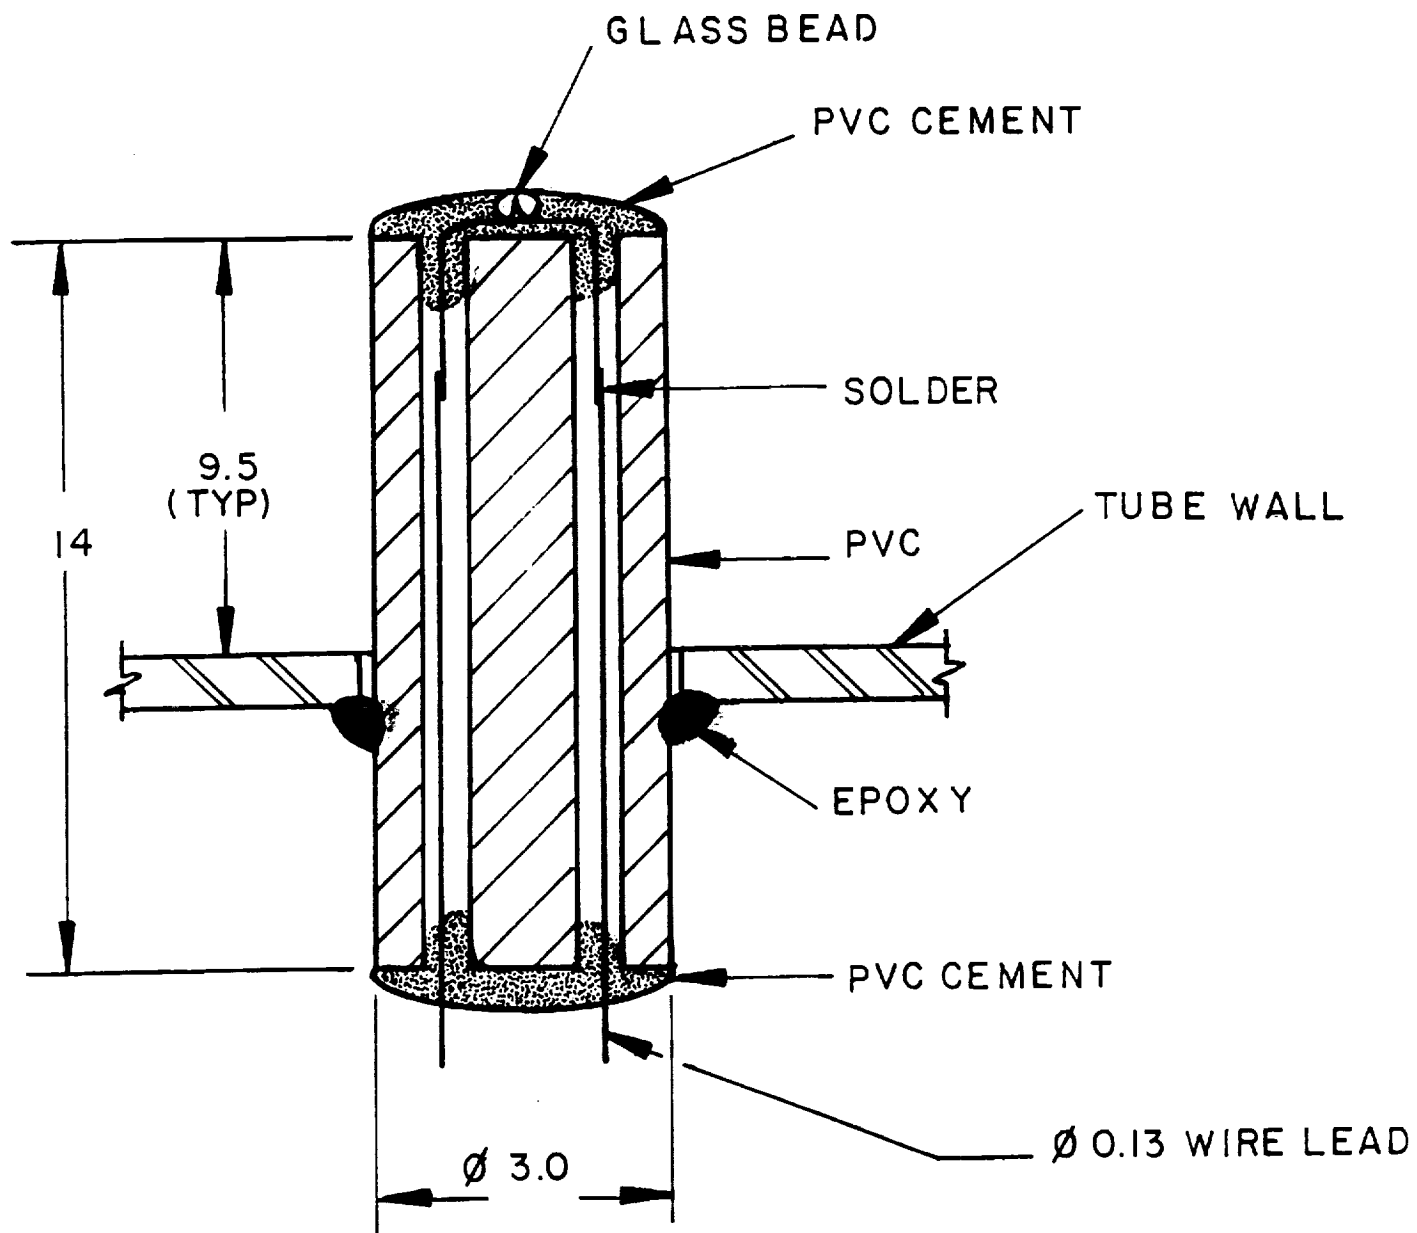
THERMISTOR ENCAPSULATION AND MOUNTING DETAIL
